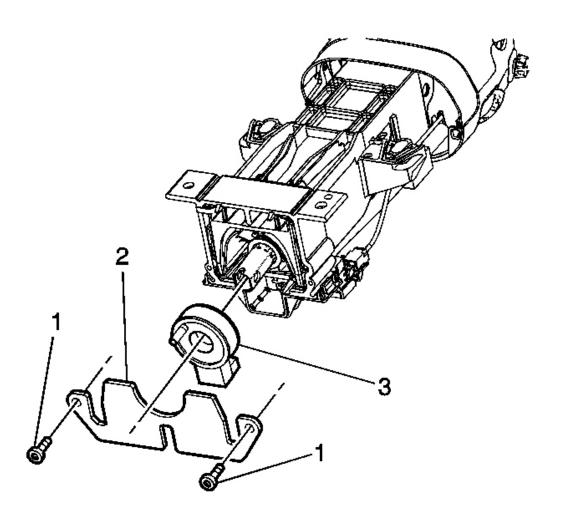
View Of Steering Wheel Position Sensor And Steering Shaft Lower Bearing Courtesy of GENERAL MOTORS CORP.
